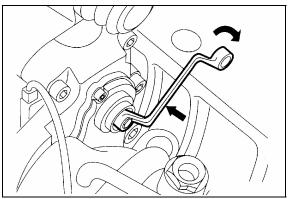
BOX WRENCH ON ADJUSTER PINION
